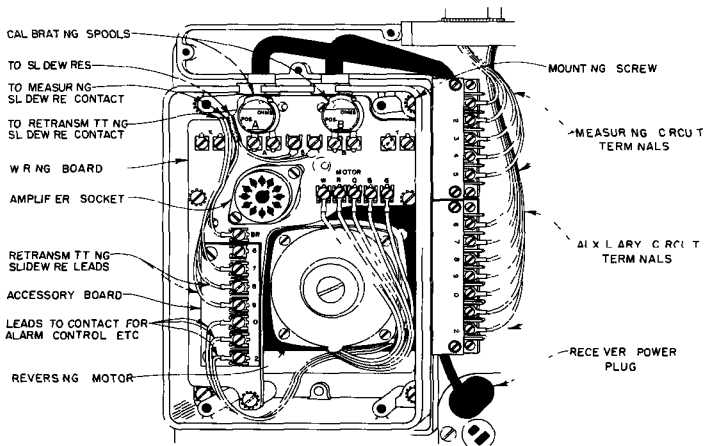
Rear View of Electric Receiver Mounted in WM55 Recorder (Amplifier Removed)
